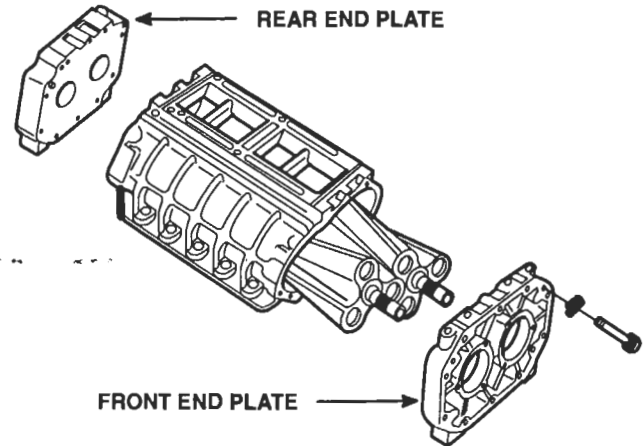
Assemble Blower Rotors into Housing and Front End Plate (Lip Type Oil Seals)
